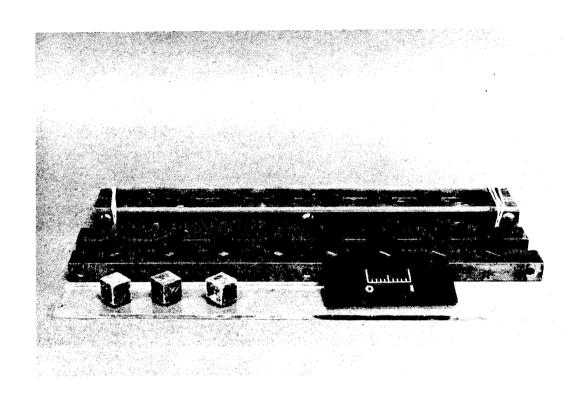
BRASS GANG MOLDS USED FOR CASTING I/2 IN. SPECIMENS
